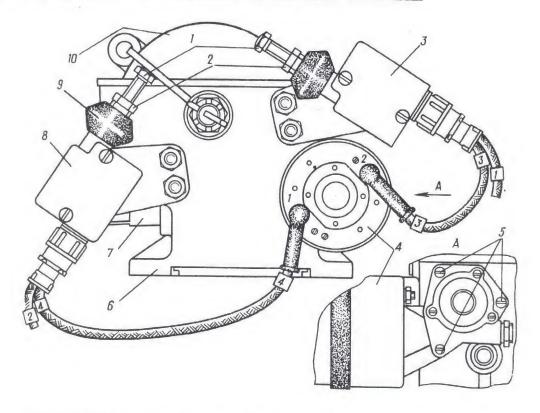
INSTALLATION OF LIMIT SWITCHES OF AIR INLET AND AIR OUTLET DOORS ELECTRIC CONTROL
